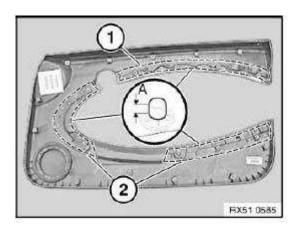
Identifying Welding Pins Measurement Courtesy of BMW OF NORTH AMERICA, INC.
